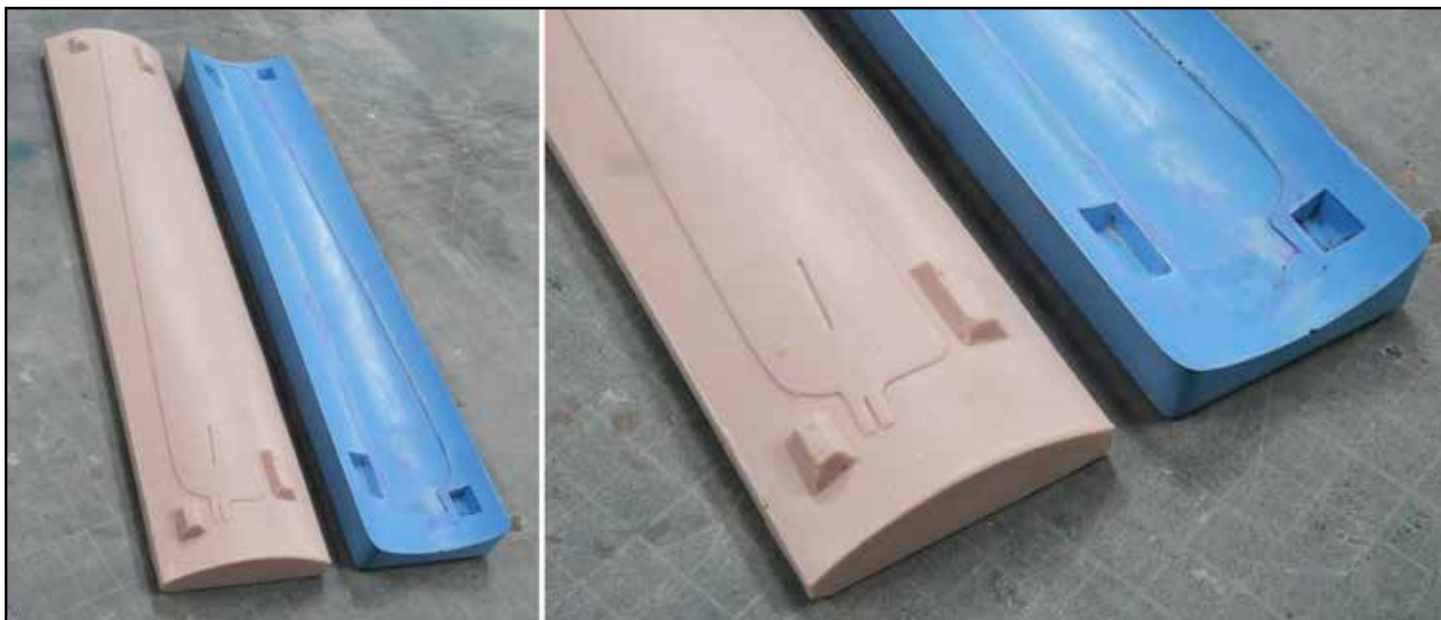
Using the reversed rubber mold, a hard resin mold was created. This would be the final mold needed to press the fibers into the surface of the balsa wood blade.
